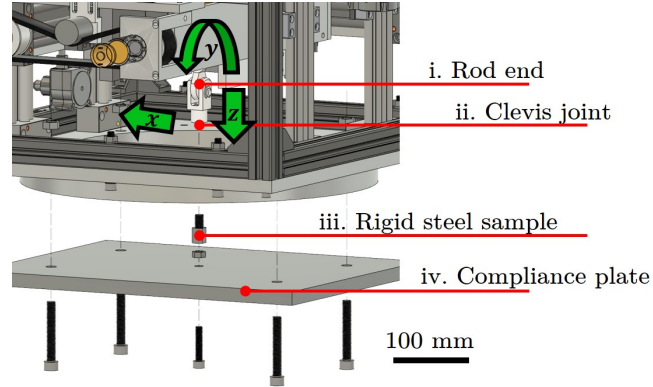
Compliance testing assembly for the multi-axis frame and key components (i-iv)
